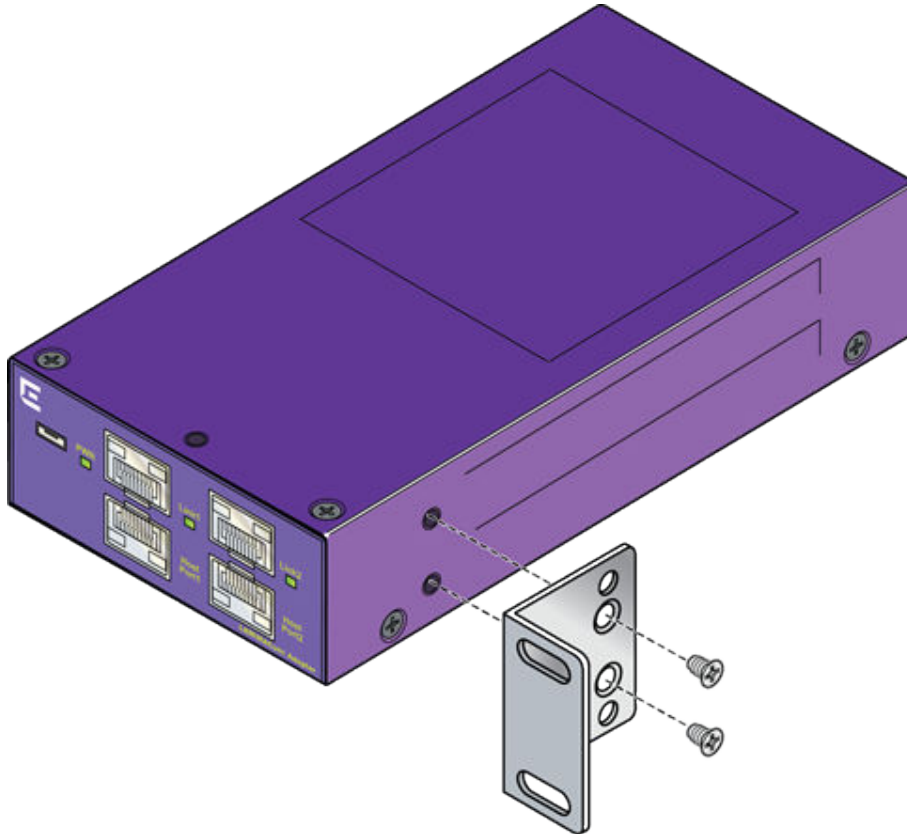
Attaching the Mounting Bracket to the LRM/MACsec Adapter
